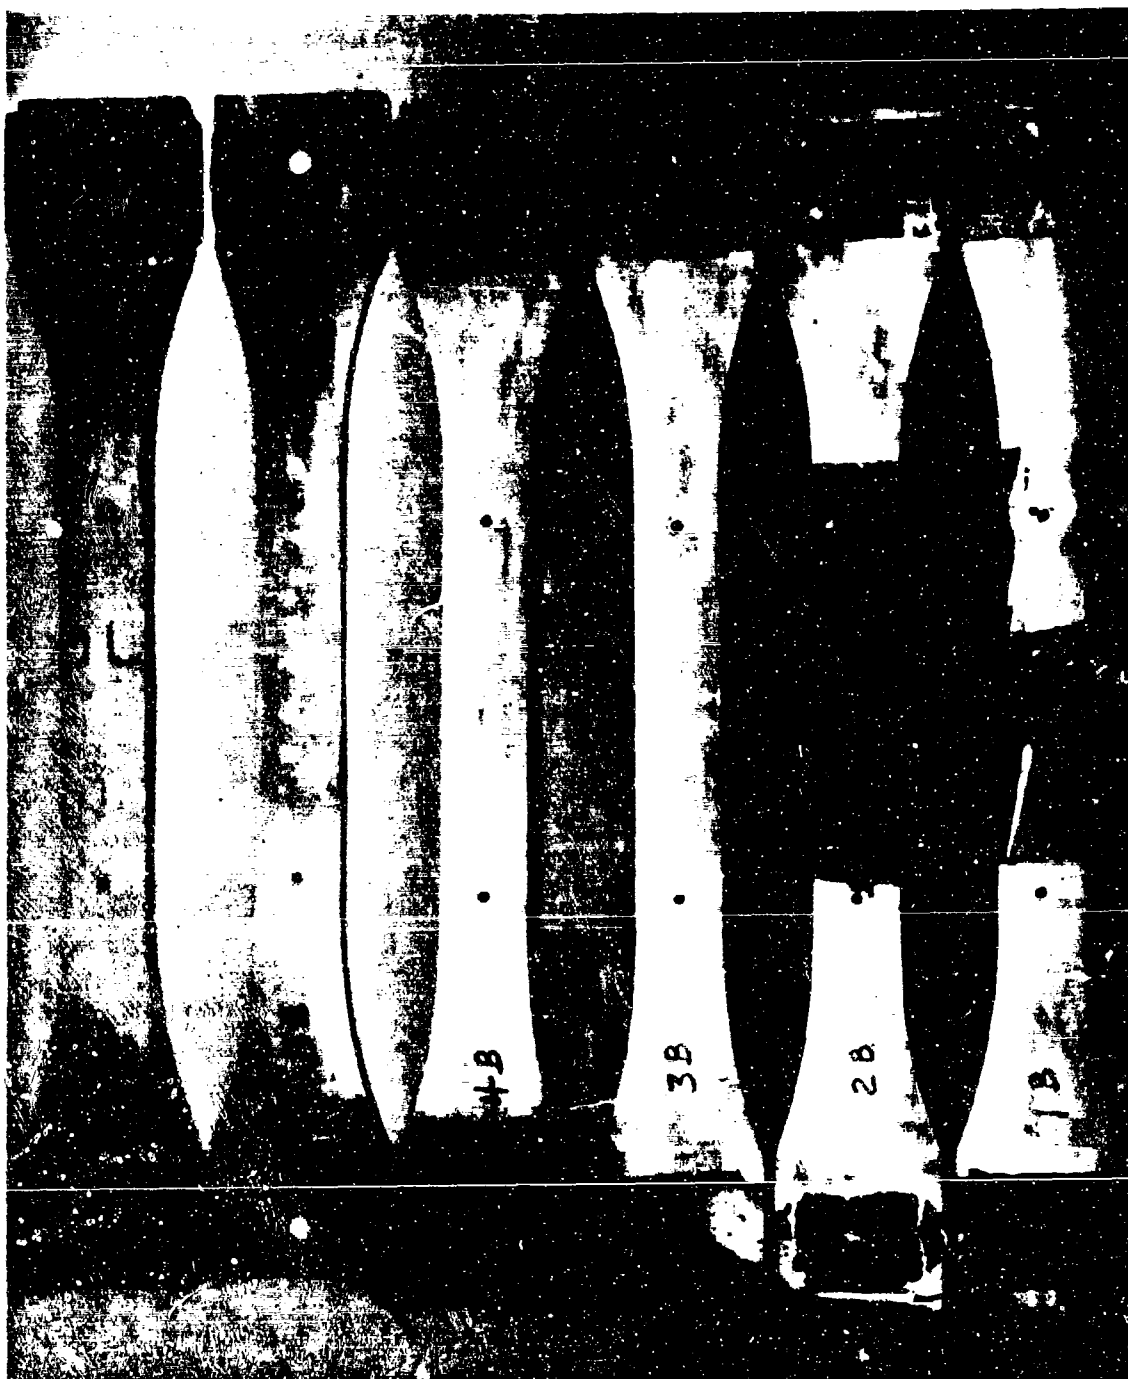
View of Side "B" of Specimens After Test Failure in Specimen 2.
